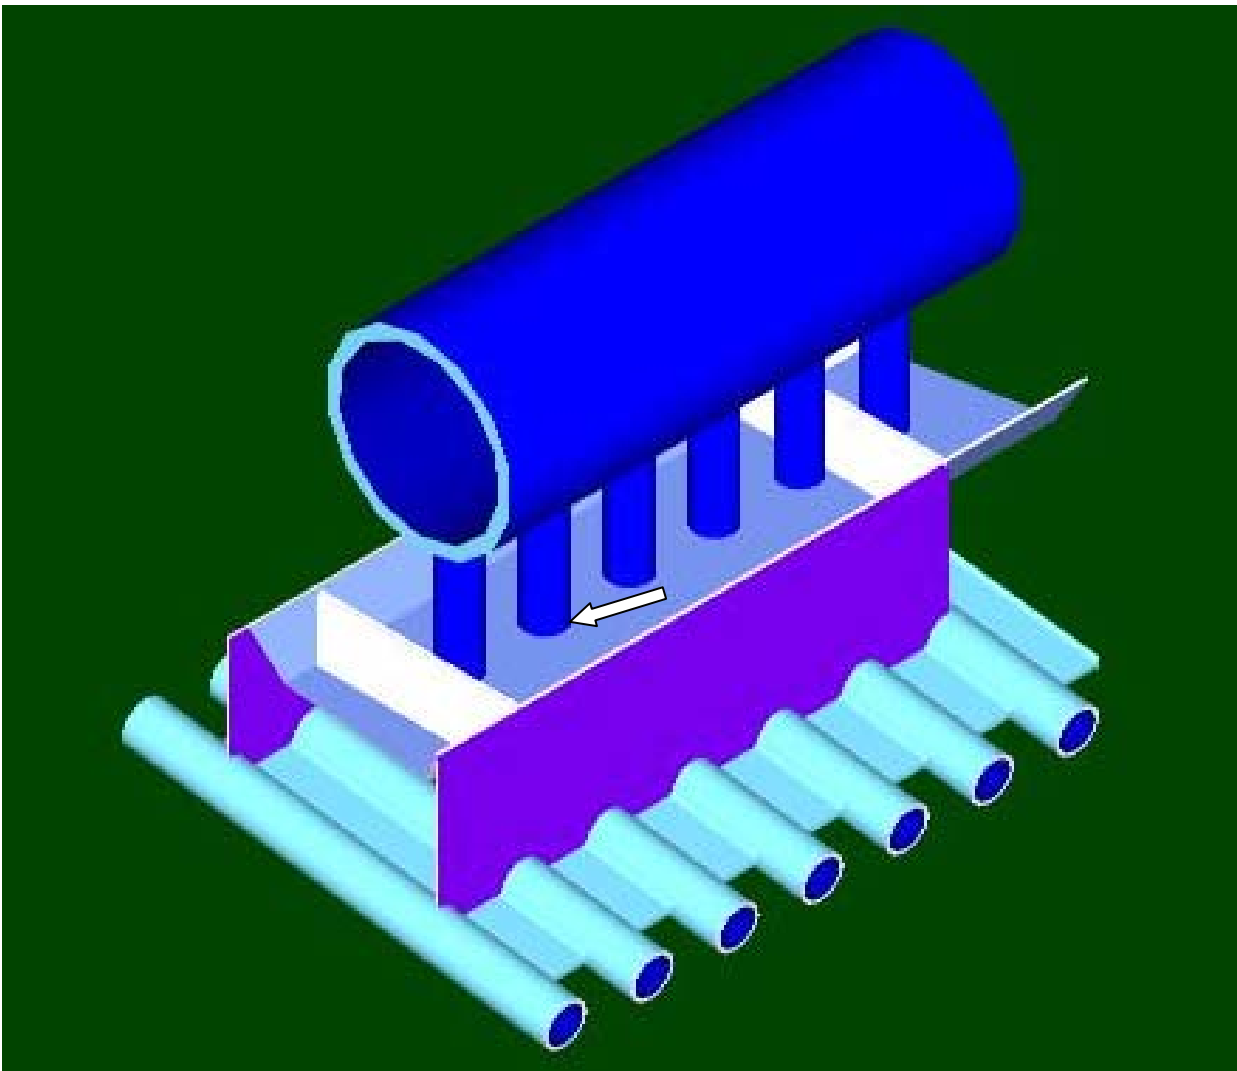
A cross sectional view of roof seal box design followed by boiler manufacturer. What was intended in Computer screen is this. This is a leak proof design taking care of differential thermal expansion between roof panel, SH tubes & the seal box. The arrow shows the location of seal weld which is missed out at site most of the time.
